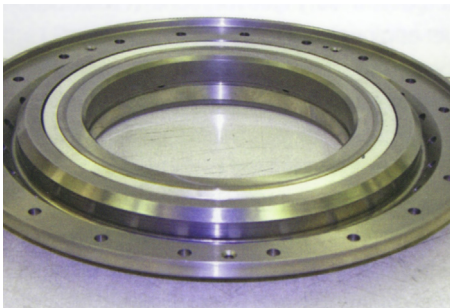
View of an assembled ball bearing, also called a thrust or location bearing. (Source: Rolls Royce.)
